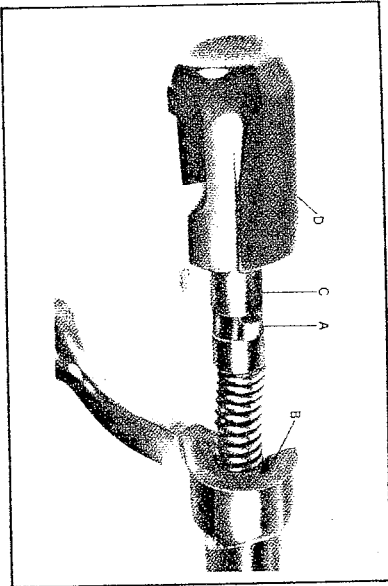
(A) Square boss, (B) Indexing groove, (C) Bolt sleeve shank, (D) Bolt sleeve.
